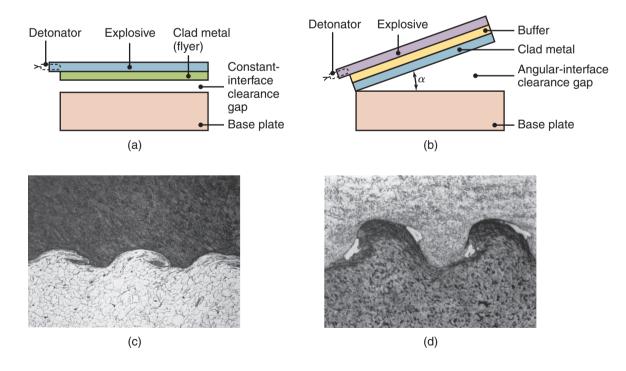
Schematic illustration of the explosion-welding process: (a) constant-interface clearance gap and (b) angular-interface clearance gap. (c) Cross-section of explosion-welded joint: titanium (top) and low-carbon steel (bottom). (d) Iron–nickel alloy (top) and low-carbon steel (bottom).
